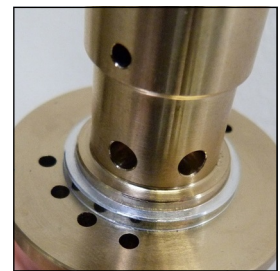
Ensure correct mounting position of the upper valve gasket
